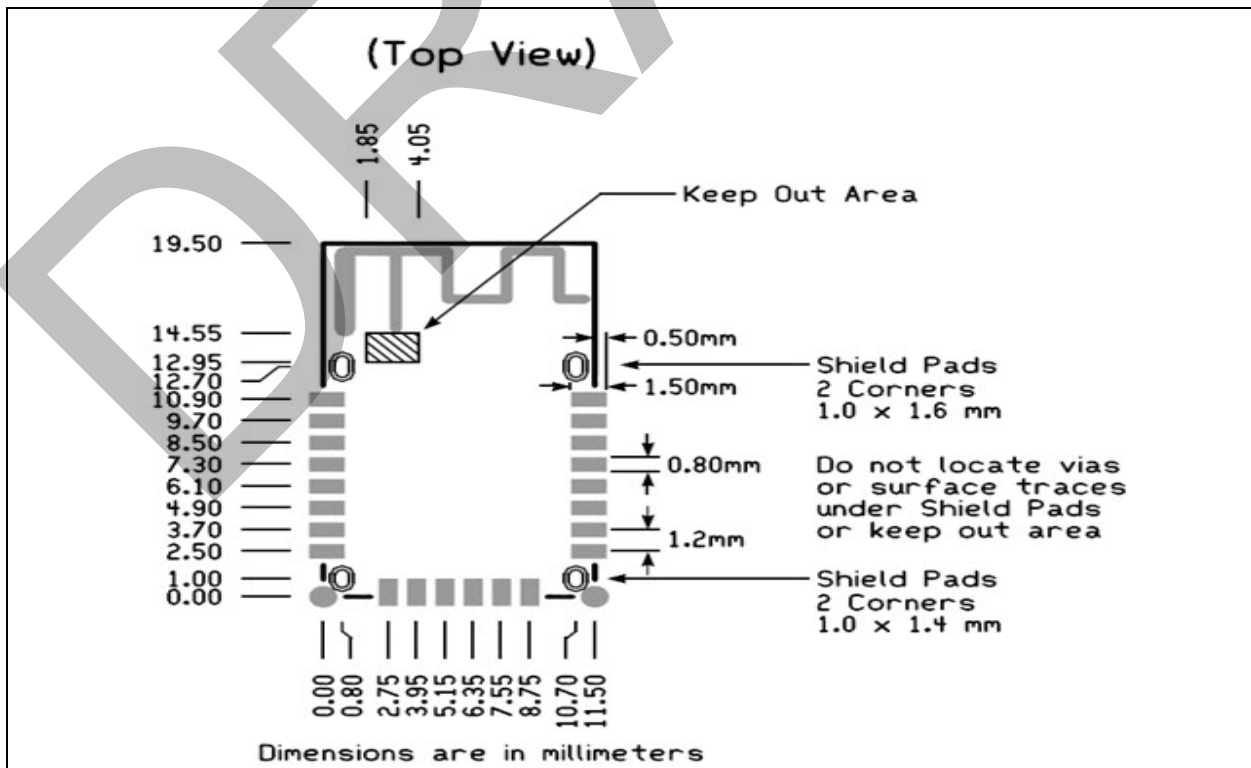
RECOMMENDED PCB FOOTPRINT
